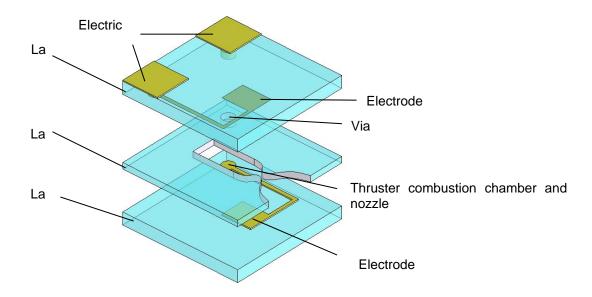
Exploded view of the LTCC electrolytic microthruster design.
